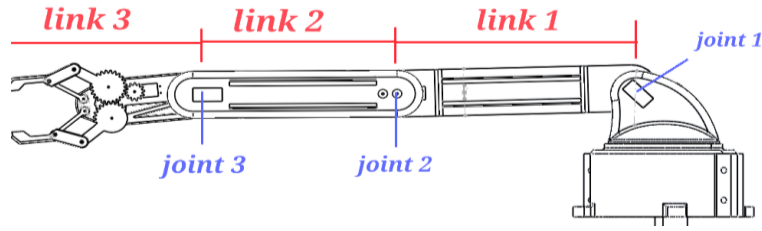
The method used for calculating the torque of the used motor on each joint. Joint 1 in the Figure is the shoulder joint
